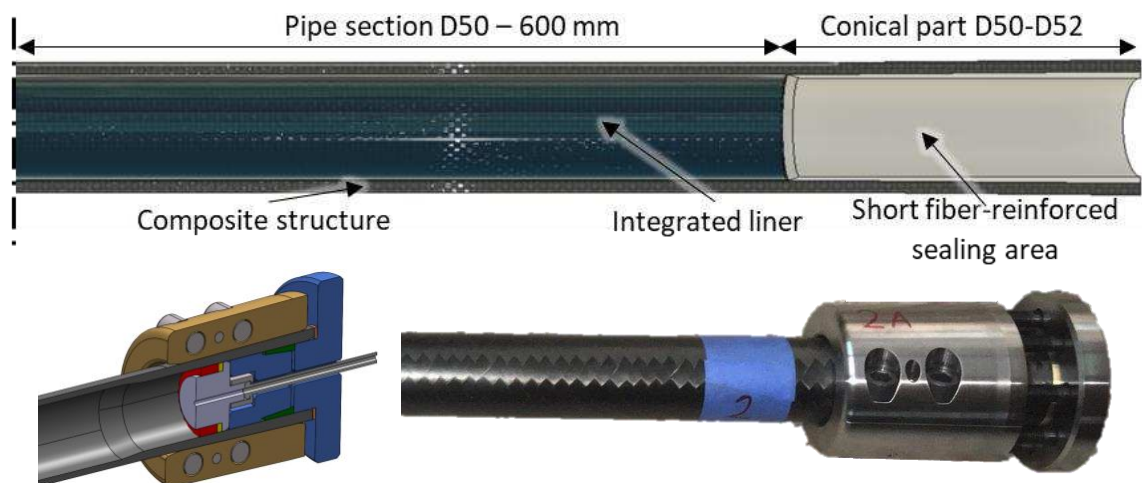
Test specimen: Part concept (Above); Sectional view of test device (Below left); Manufactured specimen with installed end-cap (Below right).
